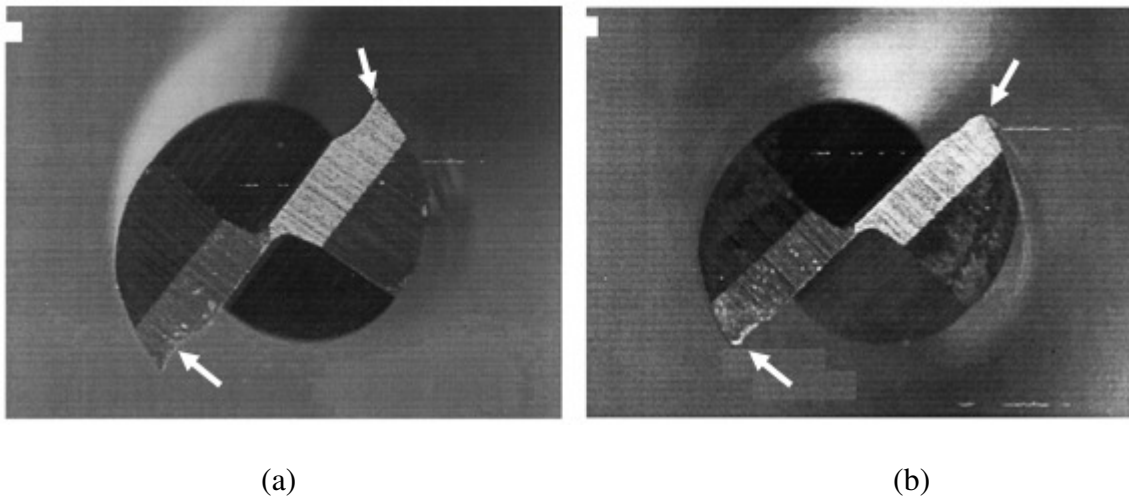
a) Arrows point to cutting edges of a new tool b) arrows point to cutting edges of a worn out tool (diameter 0.762mm) (Bao and Tansel 2000^b).
